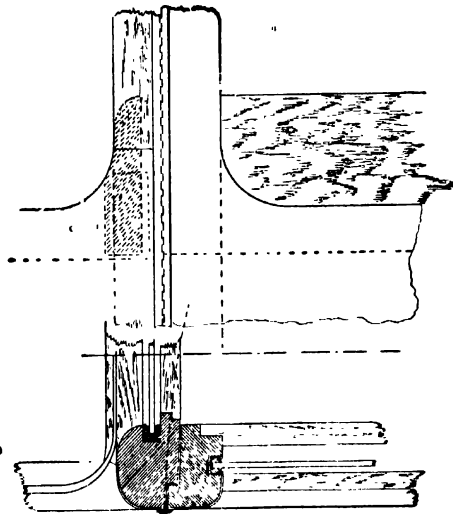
Elevation and Plan of Front-standing and Lock Pillars with Waist Rails, Garnish Rails and Glass Runs Illustrating Steel-panel Treatment of Covered Parts.
